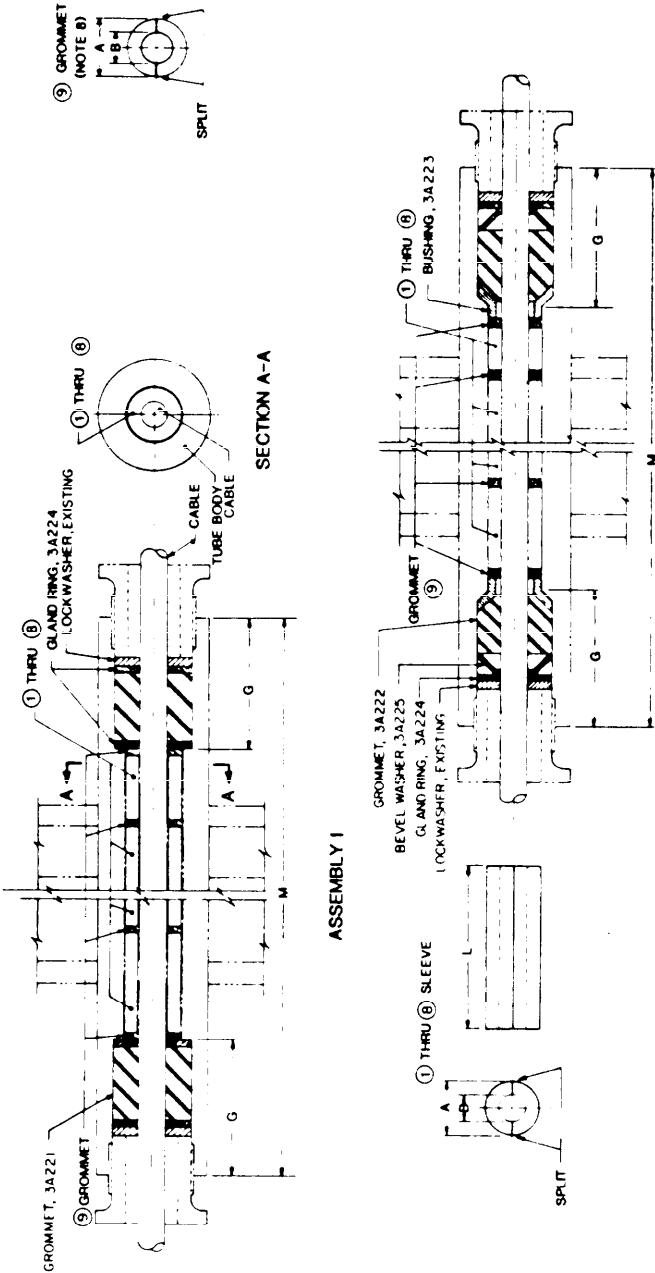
A22. Adapter assemblies for stuffing tubes MIL-S-24235.
